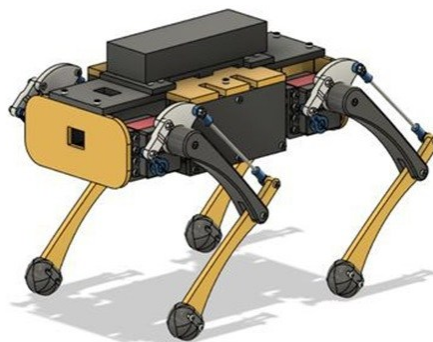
Mechanical Design of the Quadruped Robot Highlighting the Spring Joints and Wheels
